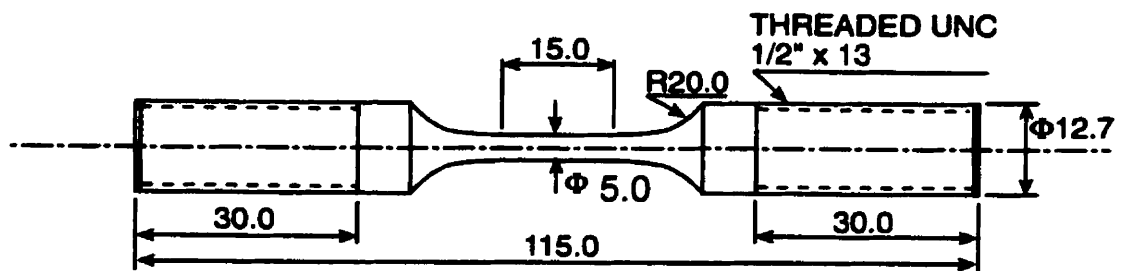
Specimen dimensions for all the tension and Bauschinger effect tests (all dimensions in mm).
